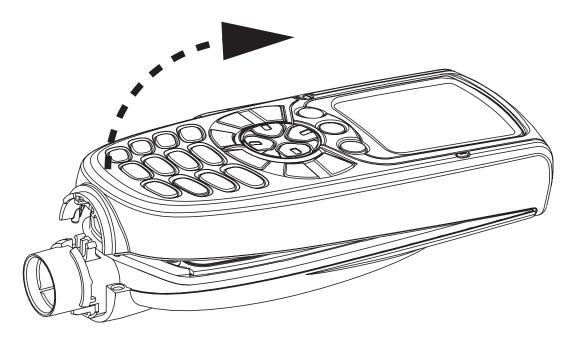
Front Housing and Back Housing Detachment3. Disconnect the 40-pin connector and separate the front housing.
